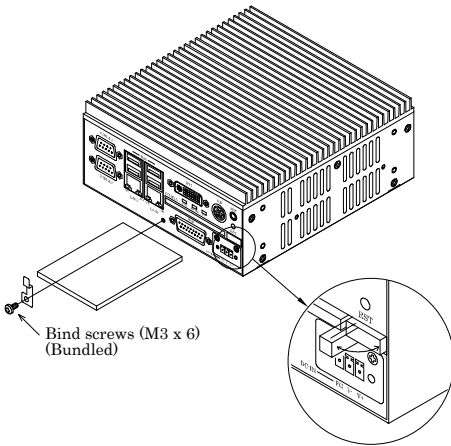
Attaching the Metal Brace to Keep the Card in Place
